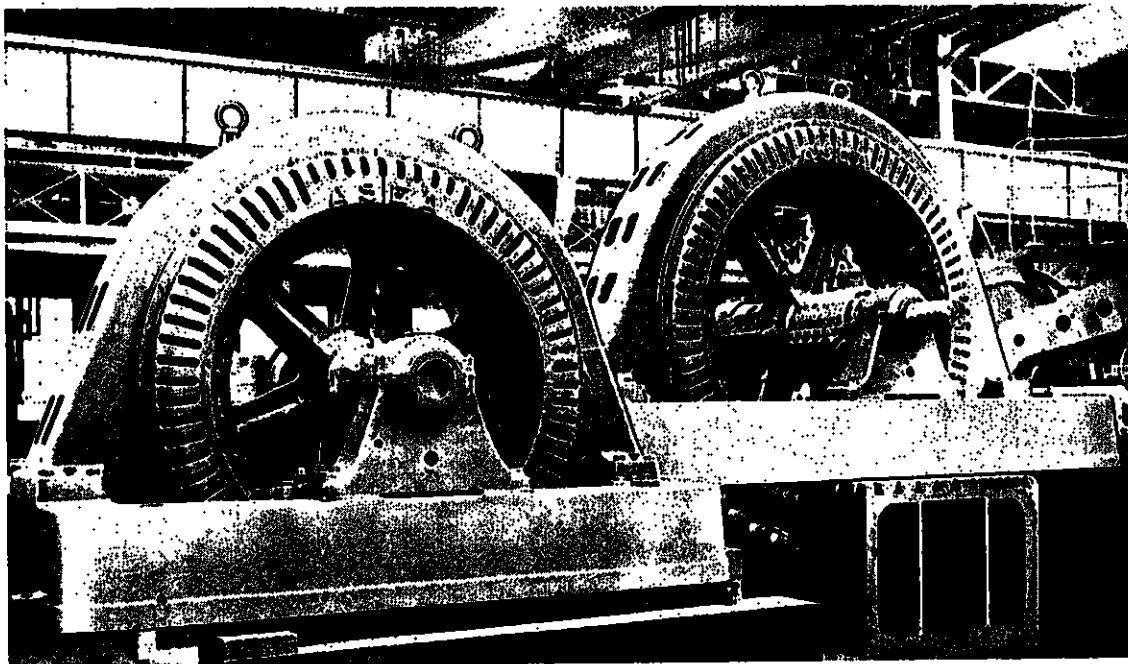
Two rolling mill motors for Sandvikens Iron Works, Sweden. To left: Three-phase motor, Type M 165, 600 h.p. at 250 r.p.m. To right: Two-speed three-phase motor, Type M 185, 800/535 h.p. at 250/167 r.p.m.
